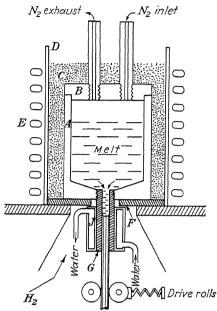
Section of Laboratory continuous Casting apparatus.
